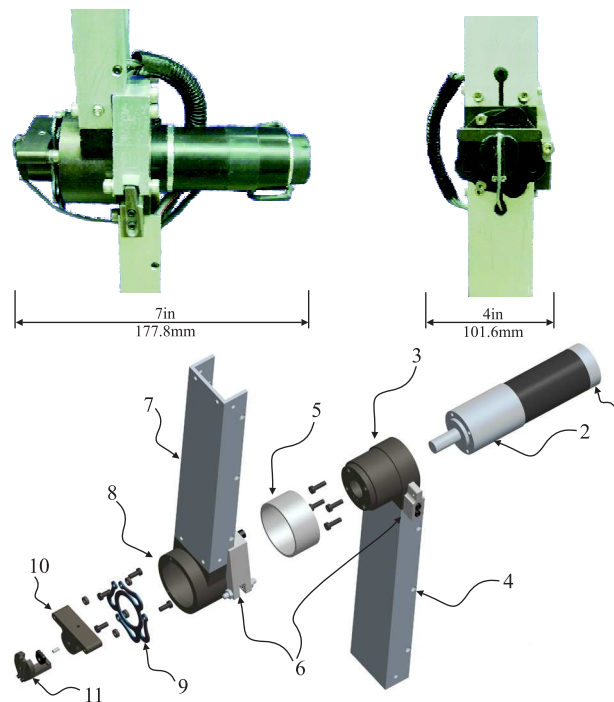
Top: Knee joint on the robot. Bottom: CAD model - exploded view of the knee joint: 1) encoder; 2) actuation unit - motor and the gearhead; 3) inner bearing housing; 4) lower leg; 5) Teflon sleeve bearing; 6) hard stop at full knee extension; 7) upper leg; 8) external bearing housing; 9) elastic coupling; 10) connecting element; 11) potentiometer and housing (not used in present implementation).
